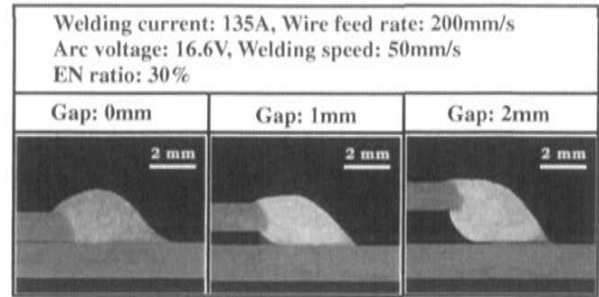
AC pulsed MIG welding at a speed of 50 mm/s
